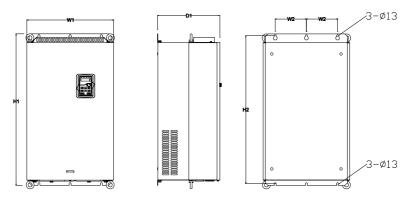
Wall installation diagram for 660V 160kW-220kW VFD models
